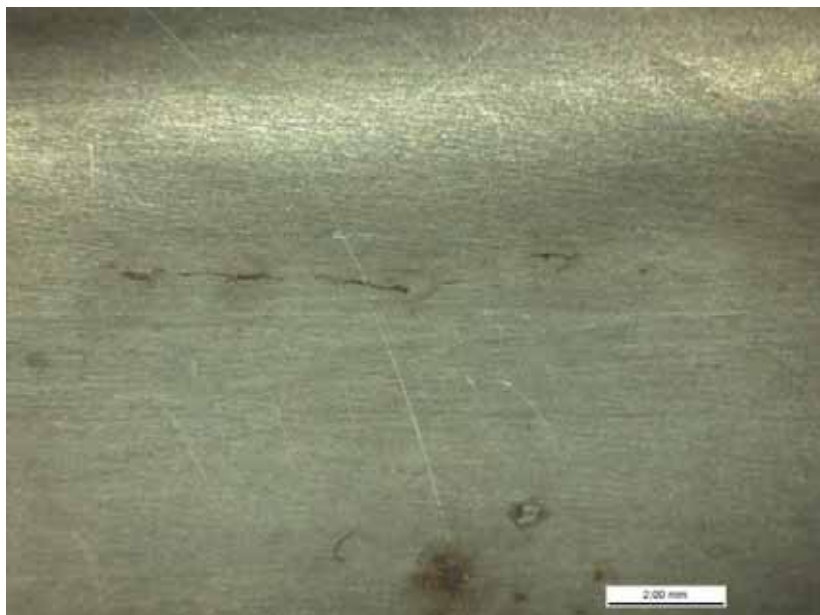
Appearance of the "toilet paper" crack on the header surface (axial direction of the header body horizontal).
